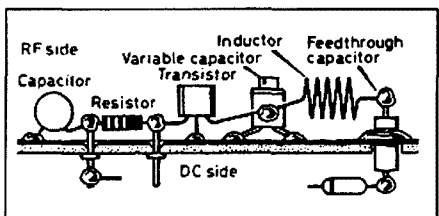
Pin-and-wire RF construction, again using single-sided board, copper side uppermost. (Courtesy RadCom).
